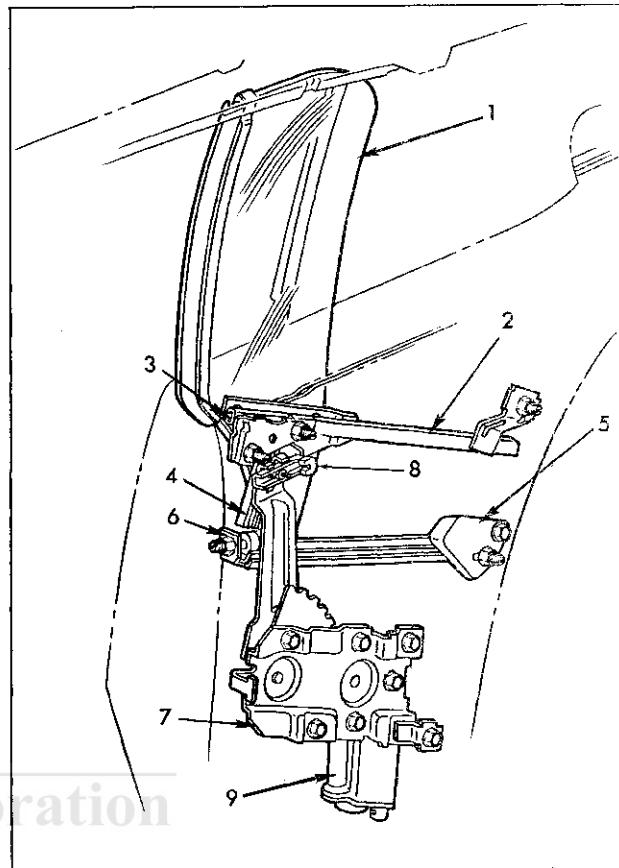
Rear Quarter Hardware - Cadillac "E" Body
